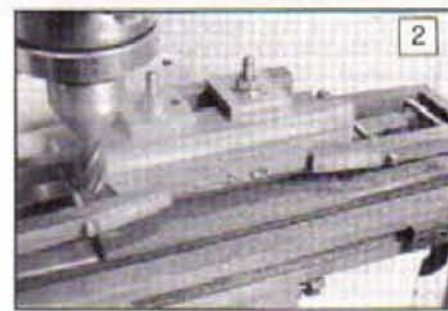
First machining operation; cutting the central web for gripping with toolmaker's clamp as shown in photo 3.
